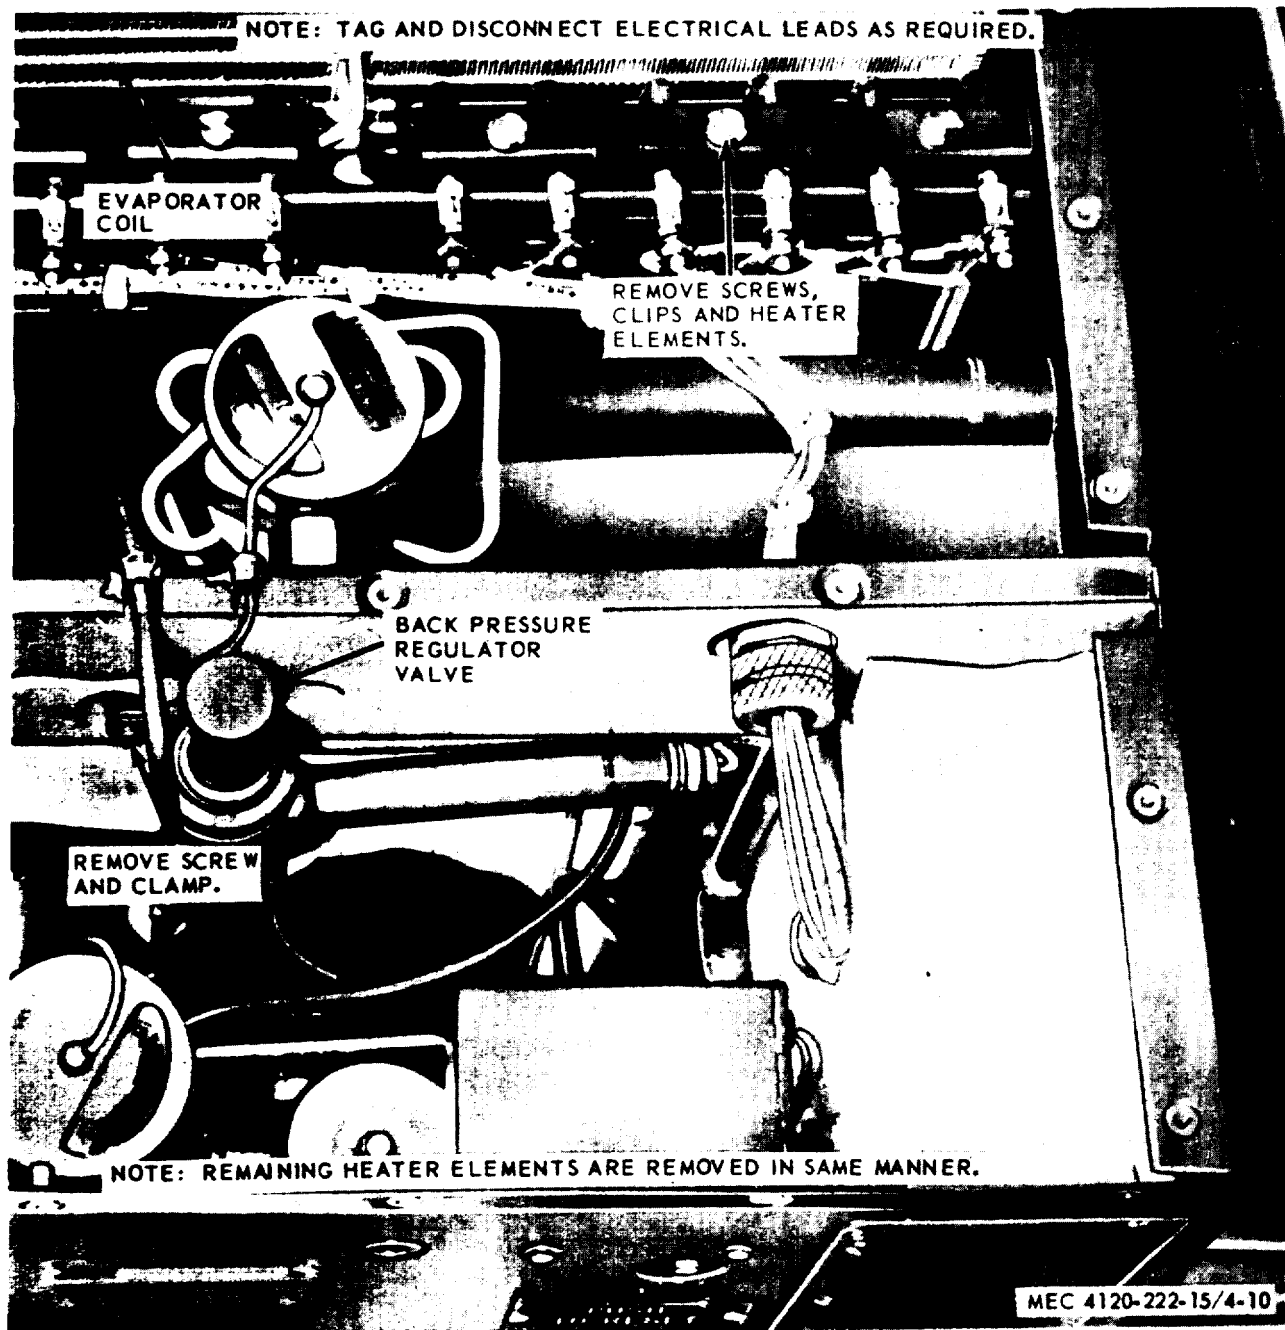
Electric heater elements and back pressure regulating valve, removal and installation.
